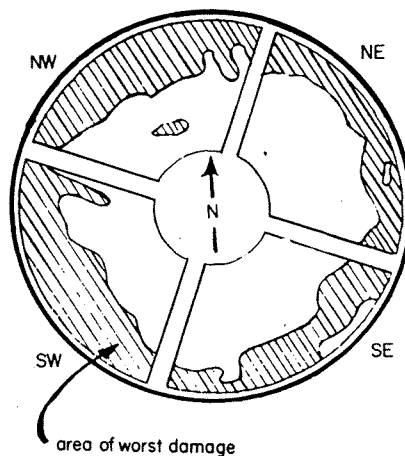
Horizontal cross-sectional diagram of reboiler showing areas of severest damage.
